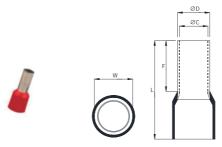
Appearance and dimensions of the tube pre-insulating lug (TG-JT type)
